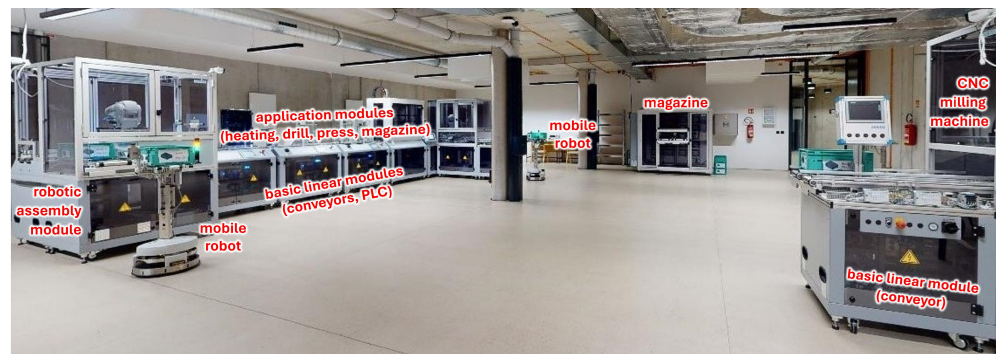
Educational Cyber-Physical Factory by Festo Co. at College of Polytechnic Jihlava.
